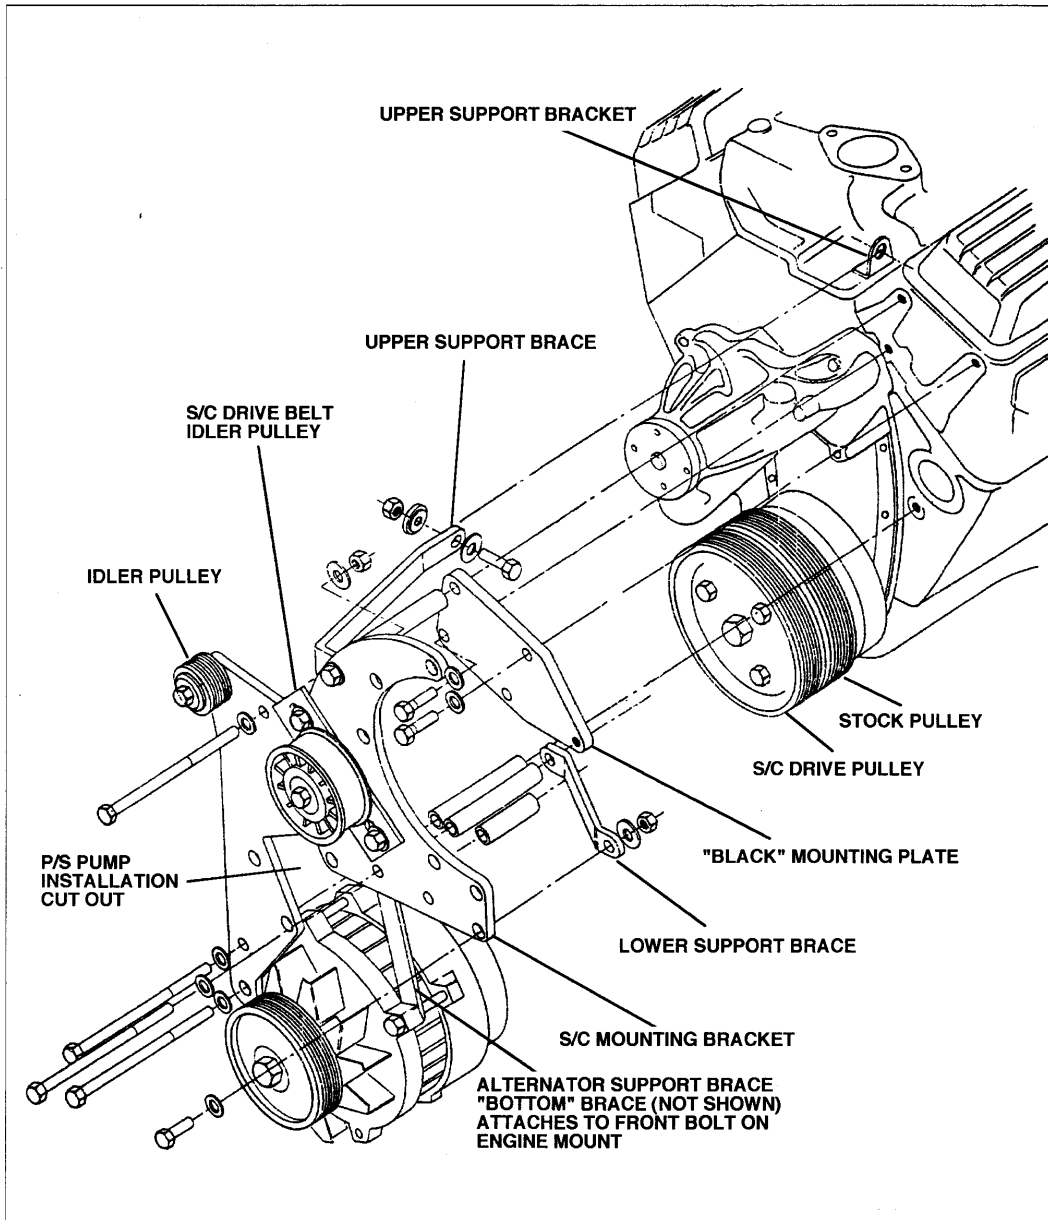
/ Exploded view of S/C mounting bracket and mounting location
